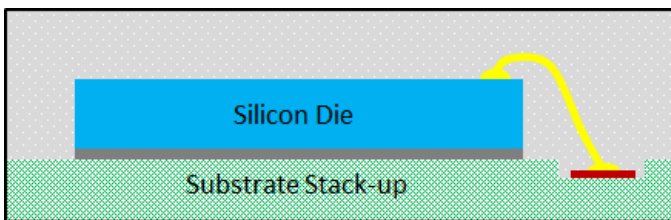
Cross-sectional view of a substrate-based electronic package.
